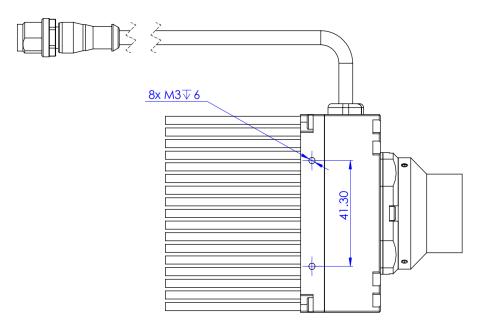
Schematic drawing of LT2PRUP device with the M3 threaded holes highlighted.
